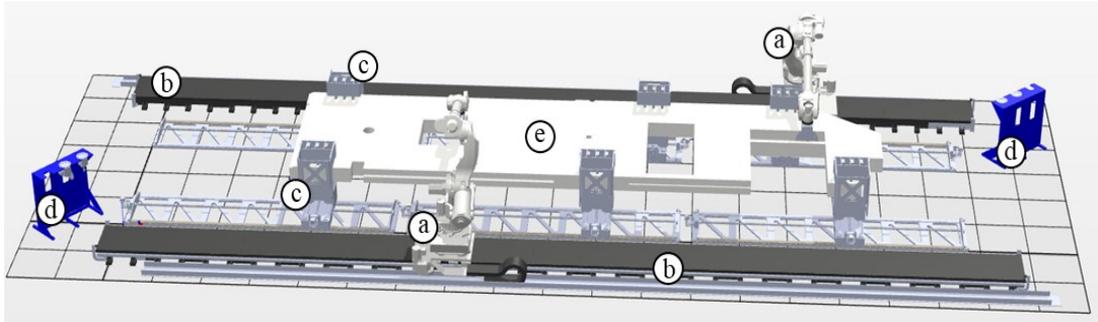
Automated robotic machining cell for cross-laminated timber panels: (a) Robot ABB® IRB 7600; (b) Track motion ABB® IRBT 7004; (c) Flexible clamping System; (d) Tool stand; (e) Minimum viable product.
